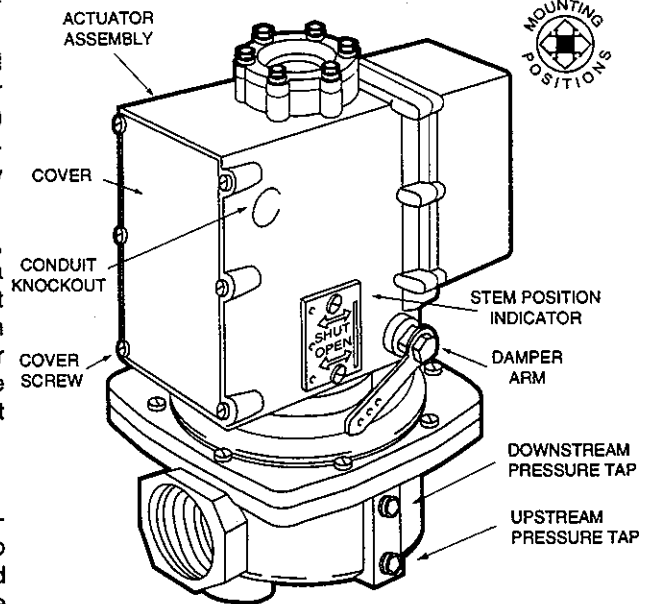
AH2B Actuator (shown mounted on V710 gas valve)
